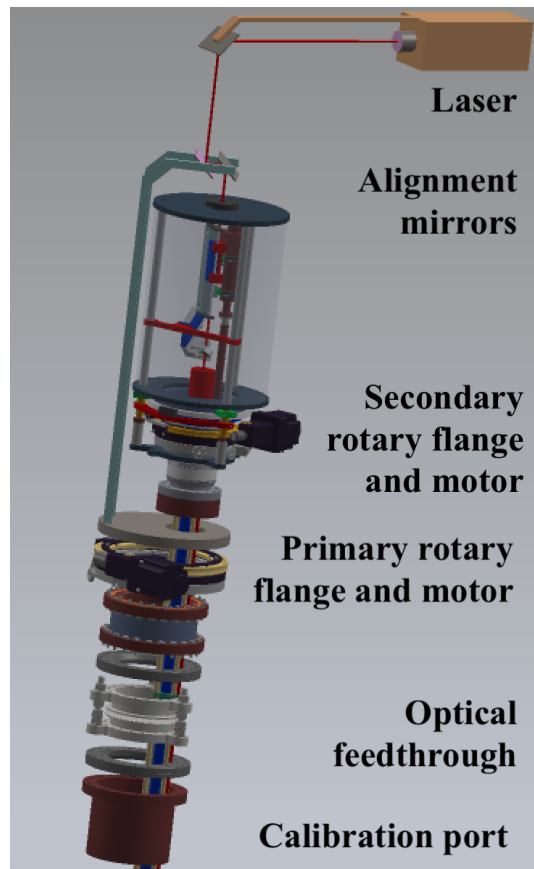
Exploded CAD drawing (preliminary) of the double rotary flange for the end-wall laser calibration ports. The calibration port is shown in brown at the bottom; the primary and secondary rotary flanges are shown in yellow, with the (black) motors next to them. The optical feedthrough is shown in the center, in blue. On top, the mirror arrangement allows the laser beam to be aligned with the optical feedthrough no matter the angle of each of the rotary flanges.
